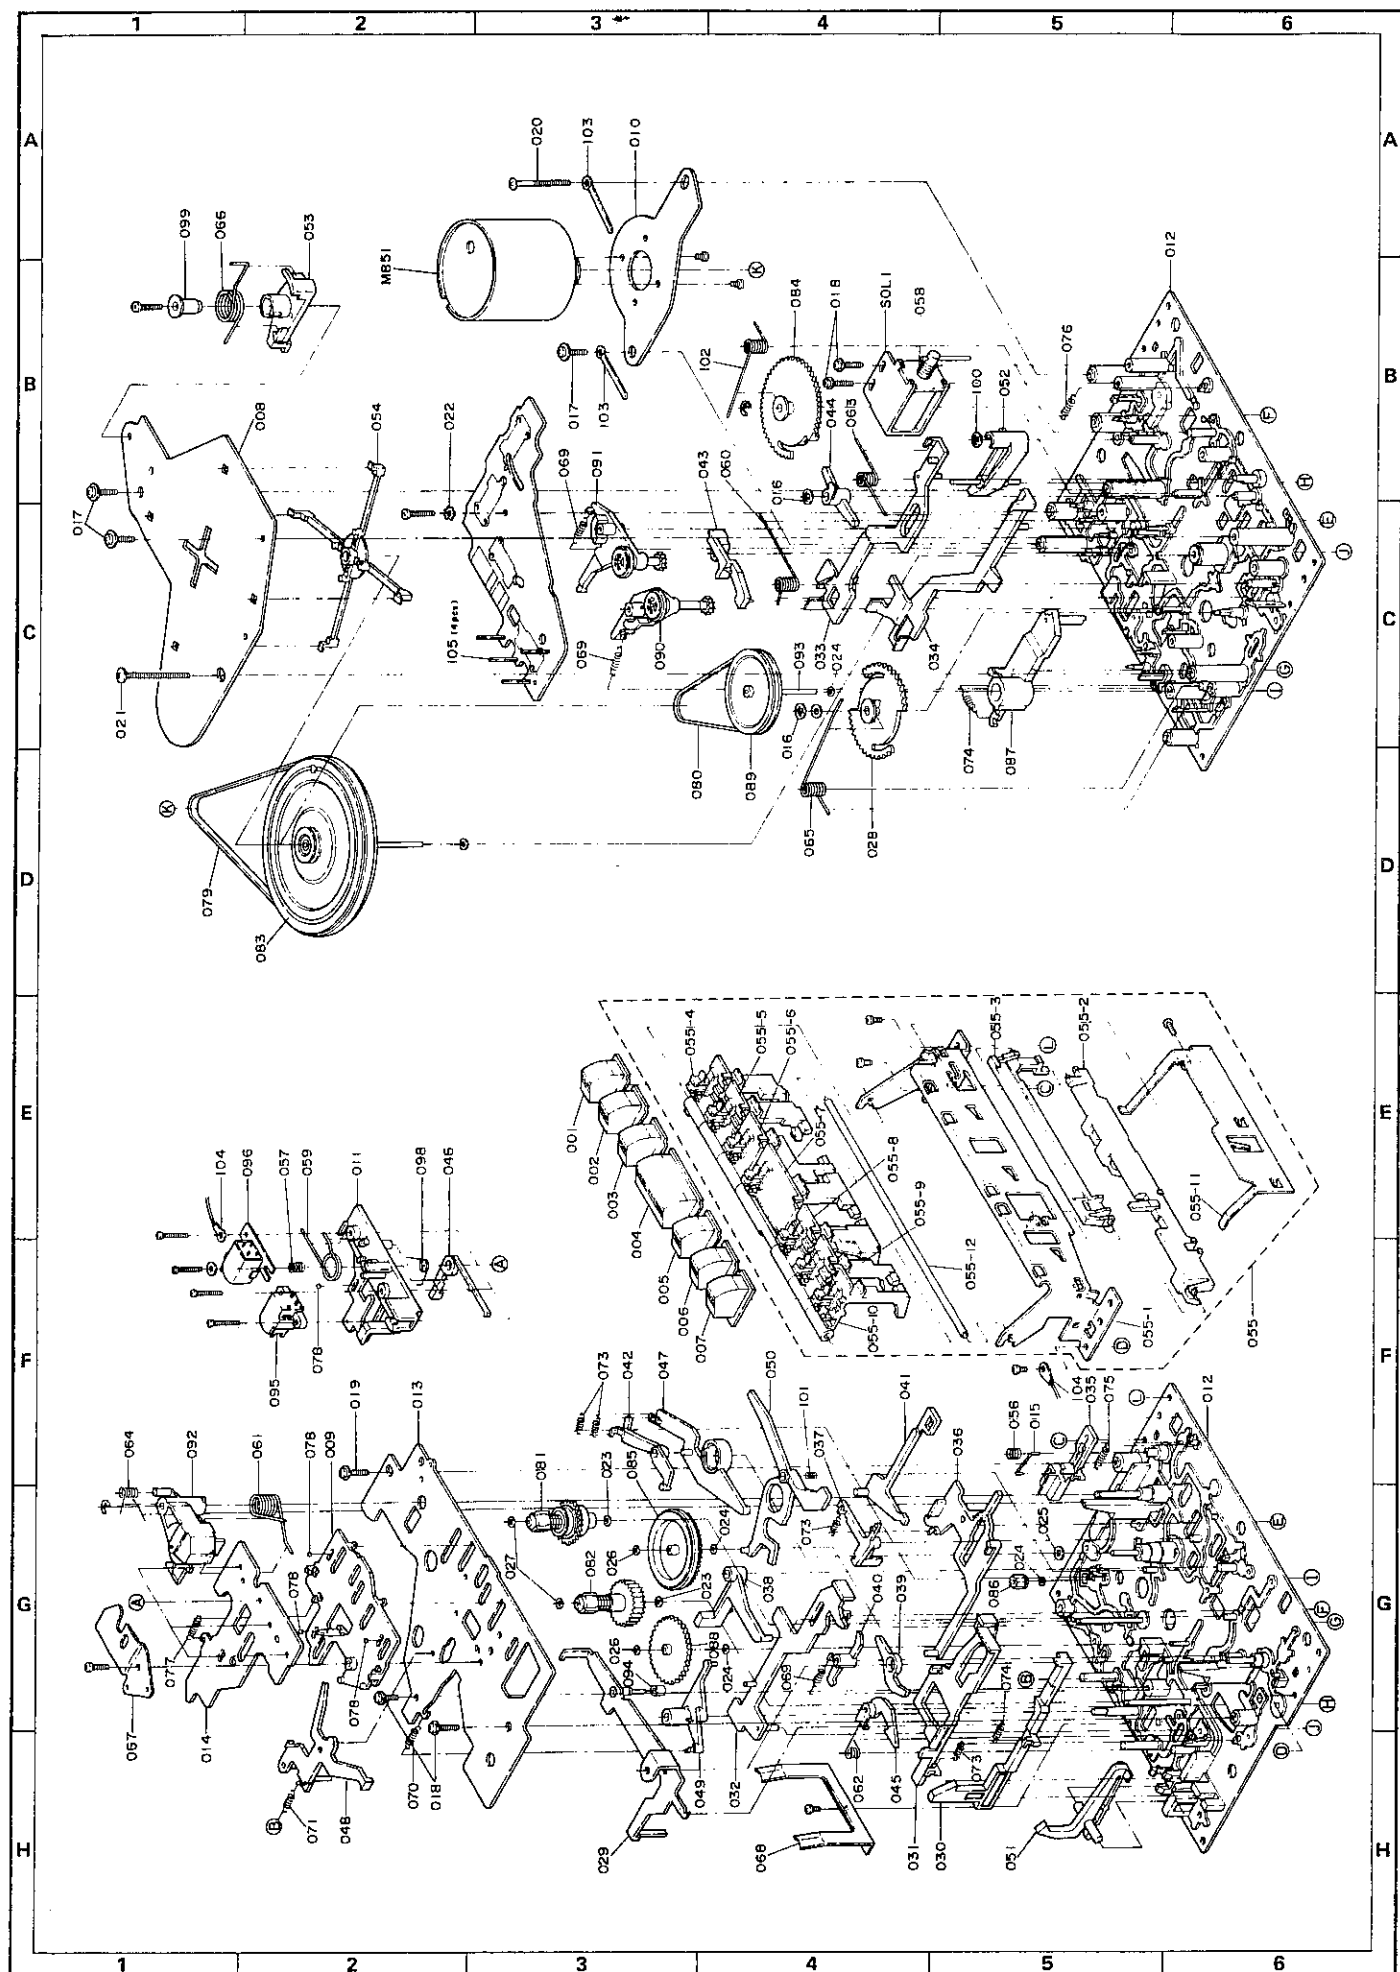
TAPE DECK MECHANISM EXPLODED BOTTOM VIEW
